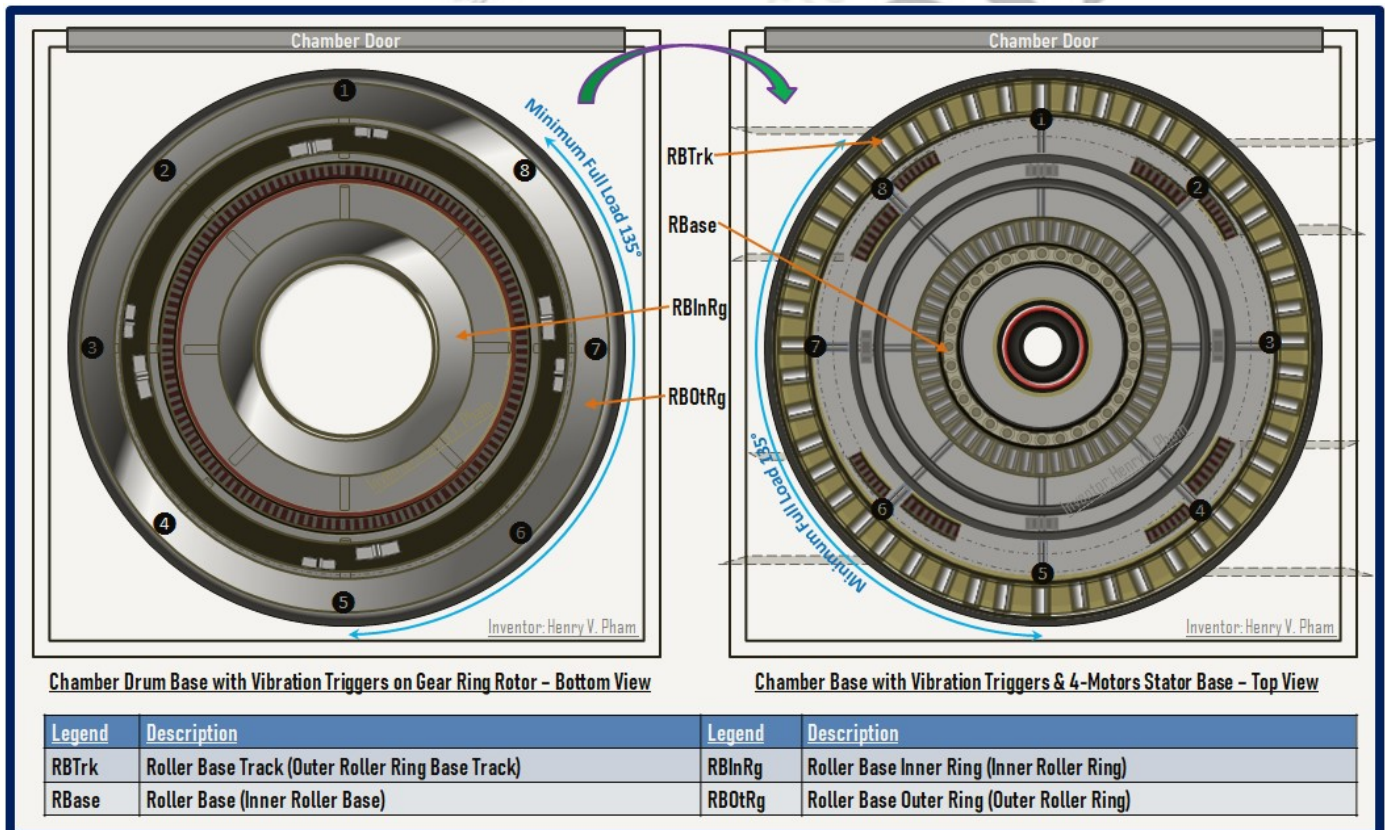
Rotator Drum Base & Stator Chamber Base with Roller Rings View
